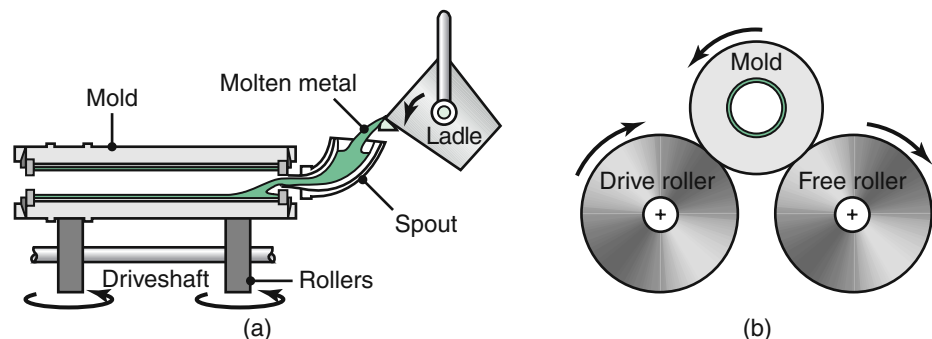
(a) Schematic illustration of the centrifugal-casting process. Pipes, cylinder liners, and similarly shaped parts can be cast with this process. (b) Side view of the machine.
